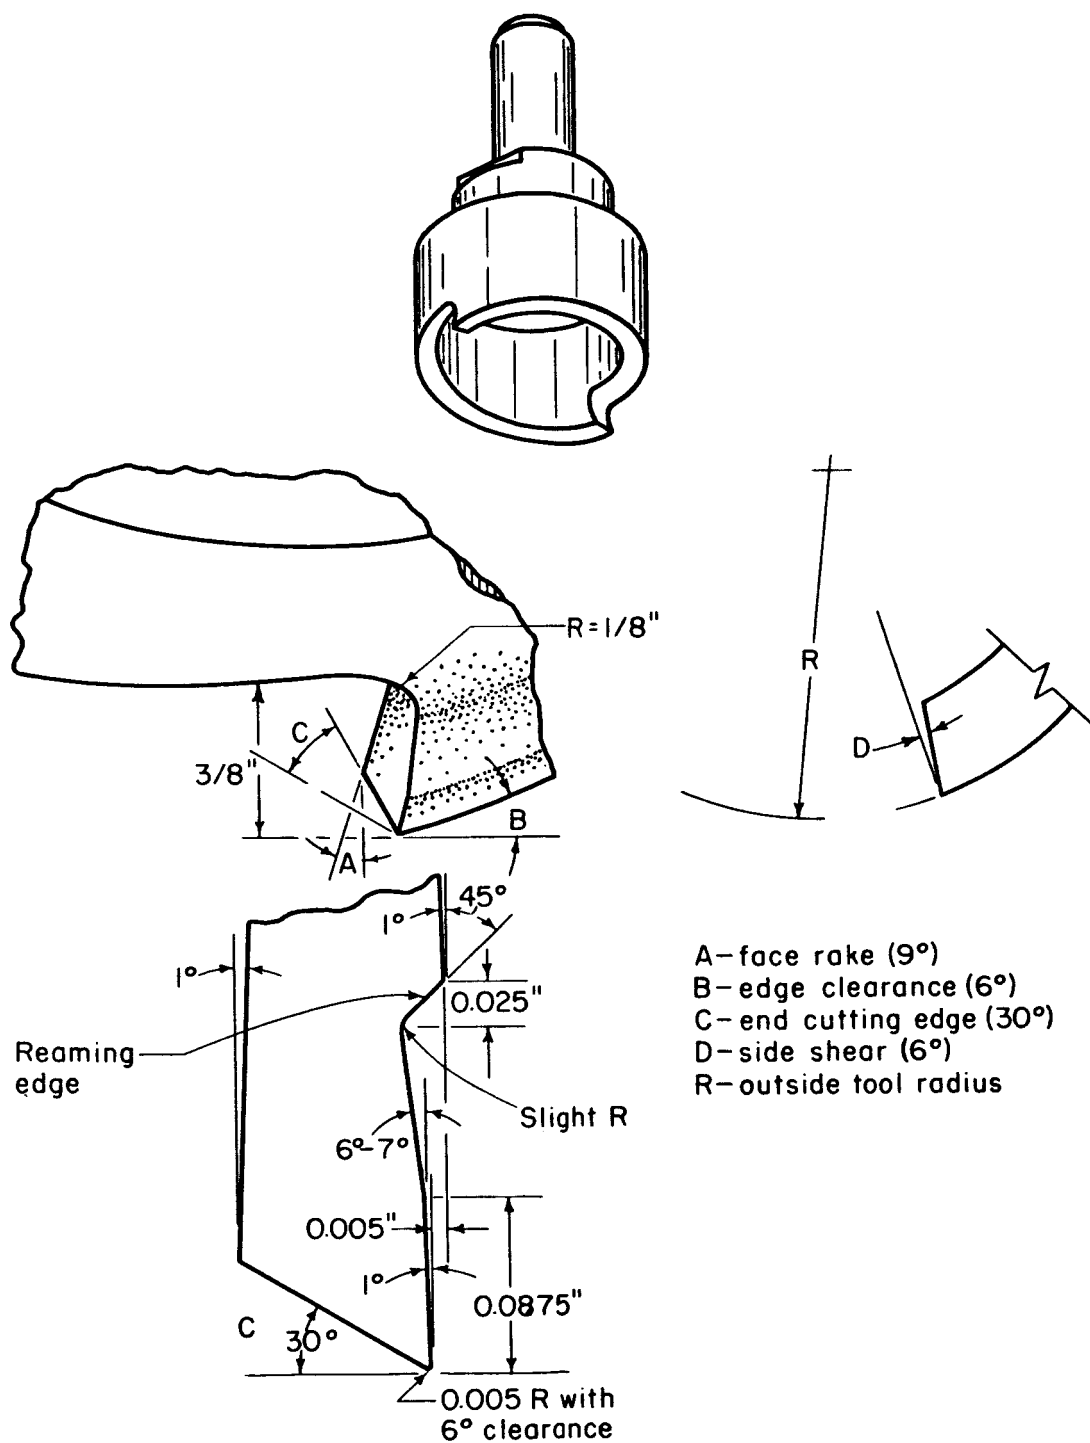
TREPPANNING TOOL AND TOOTH FORM (REF. 33)
